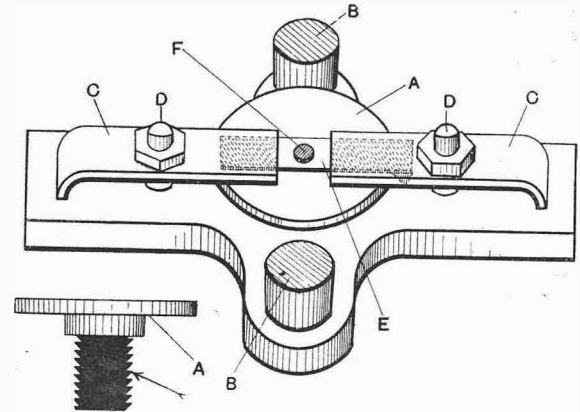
Perspective plan view of jig for filing the points of trembler blades flat.
